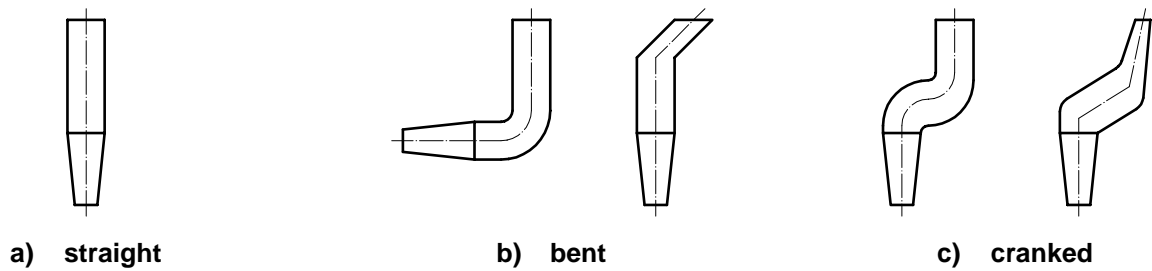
Spot welding electrodes with male taper at mounting end and flat tip
